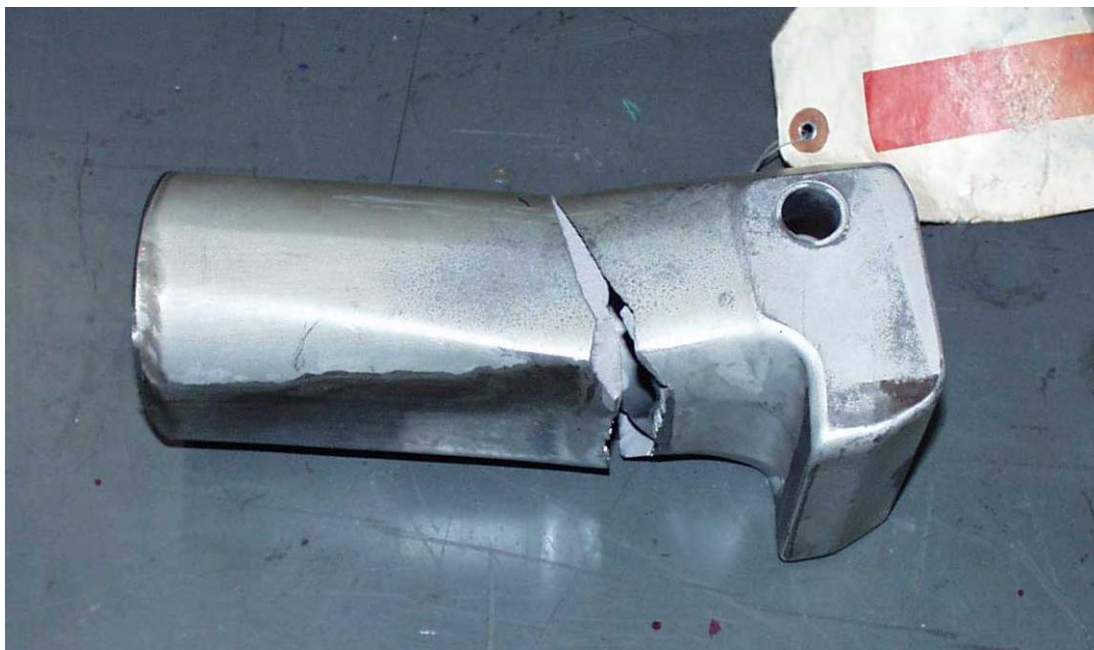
Fatigue Test Failure Location for Shank PT0735 (Side View)
